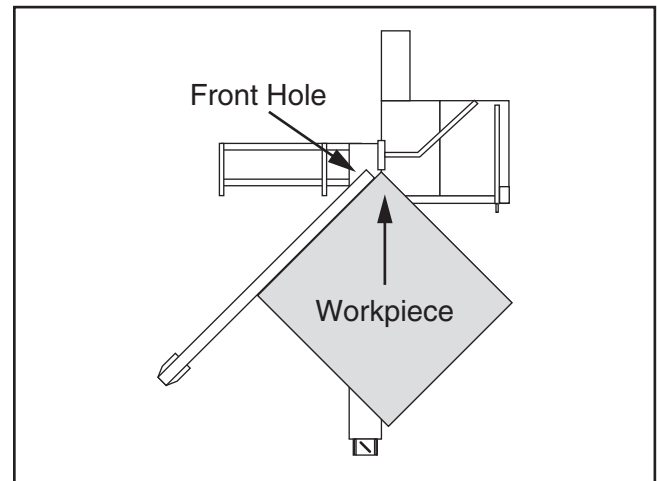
Crosscut fence mounted in front hole for miter cuts from 0° to 45°.
